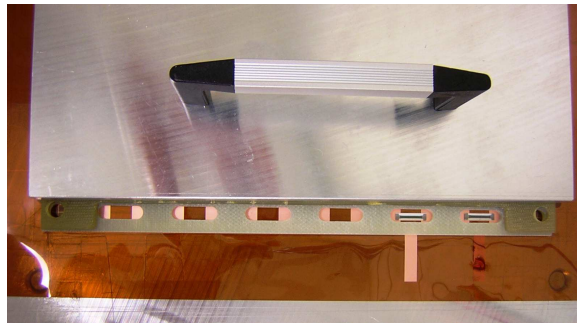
Soldering of the SMD limiting resistor inside the six slots of the frame.
